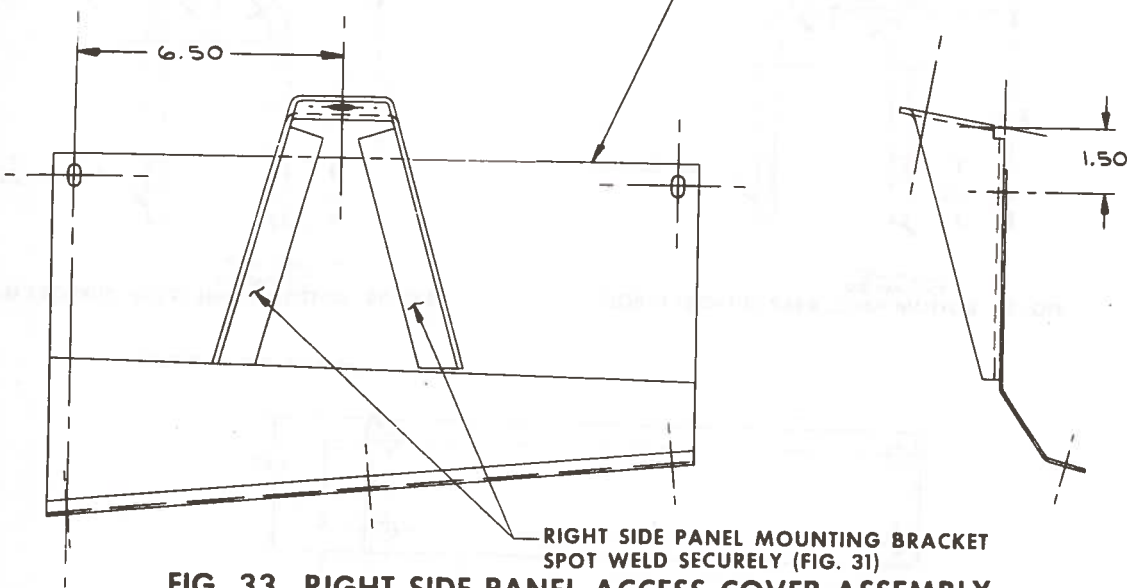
RIGHT SIDE PANEL ACCESS COVER ASSEMBLY
